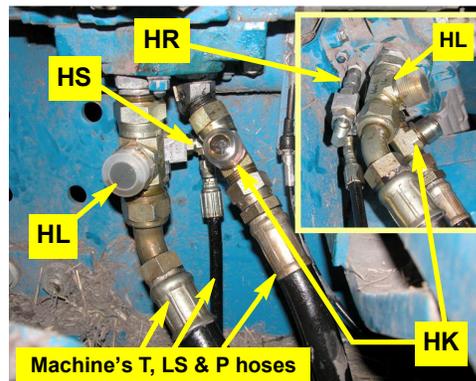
Load sense valve and run-tees installed, machine's hoses reconnected
